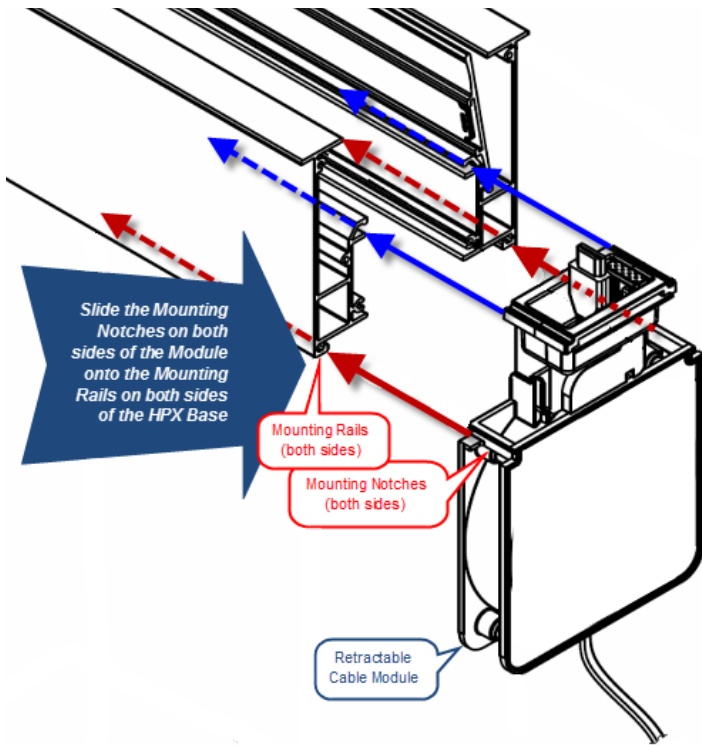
RETRACTABLE CABLE MODULE - MOUNTING INTO AN HYDRAPORT BASE ASSEMBLY
